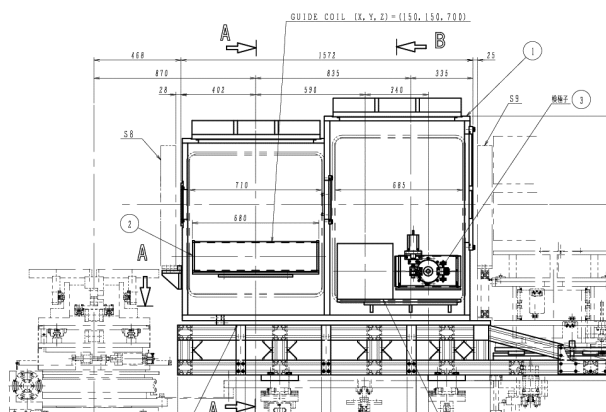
Cross sectional view of the newly installed vacuum chamber.
